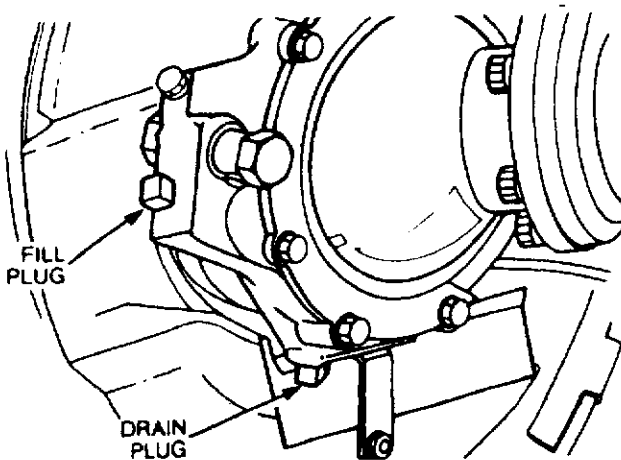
Swivel Pin Housing Drain and Fill Plugs
